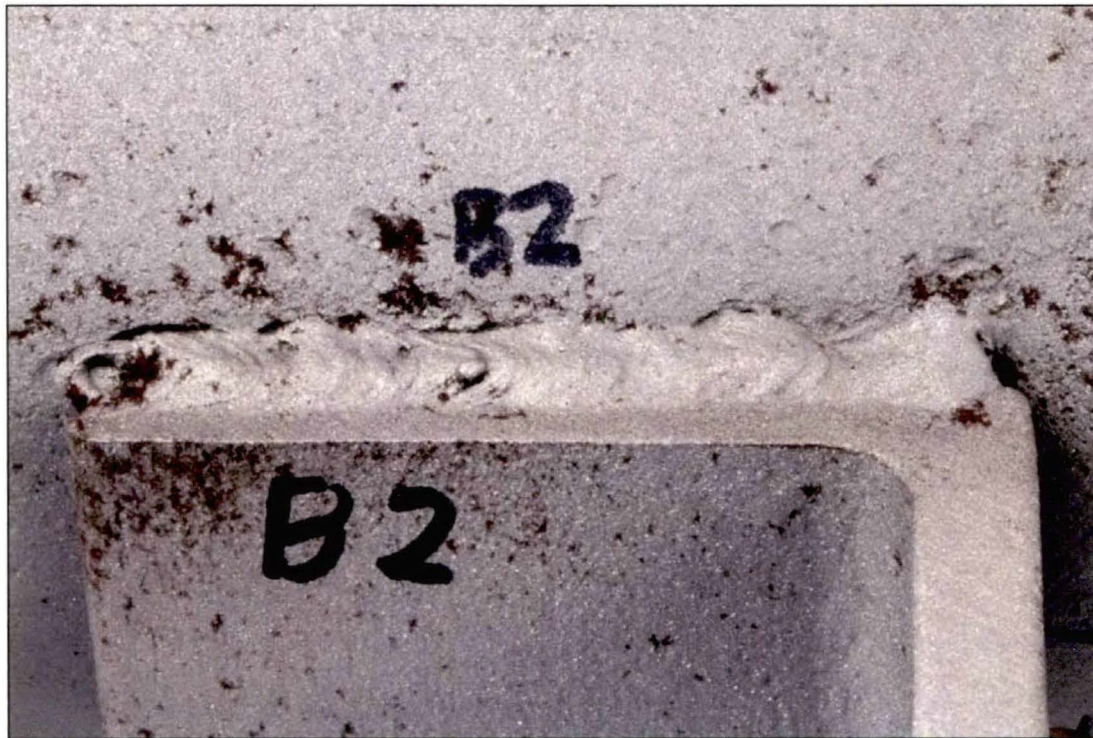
Image of the Lug B2 top weld region. This weld exhibited substantial fusion.
